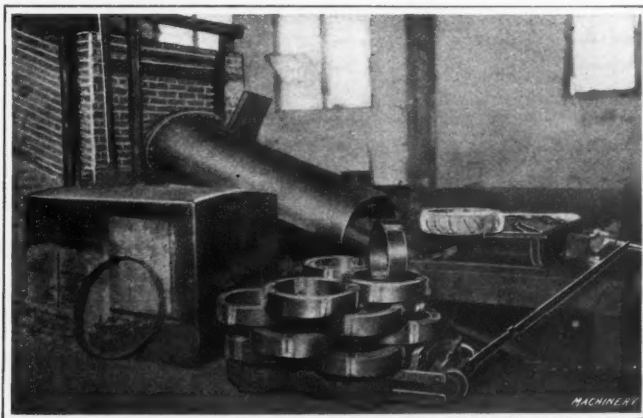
Entering End of Gas Medium Furnace for annealing Steel
